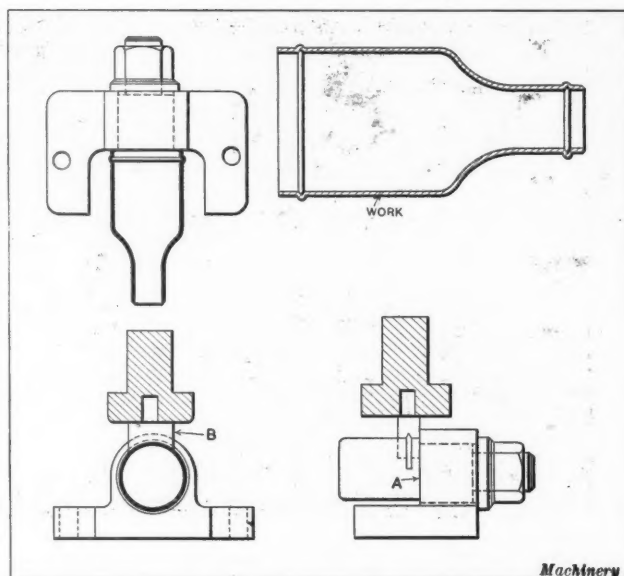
Type of Die employed for forming the Beads on the Ends of the Shell
